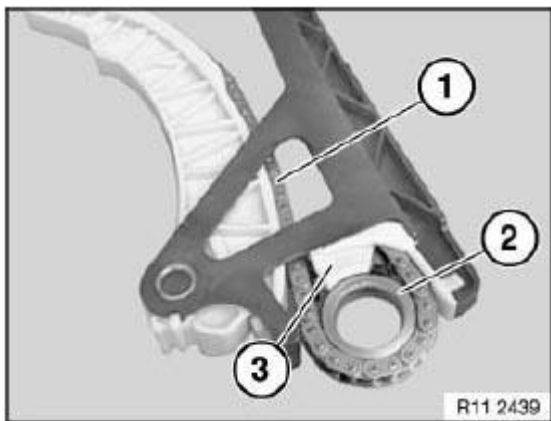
Identifying Timing Chain, Sprocket Wheel And Chain Guide
